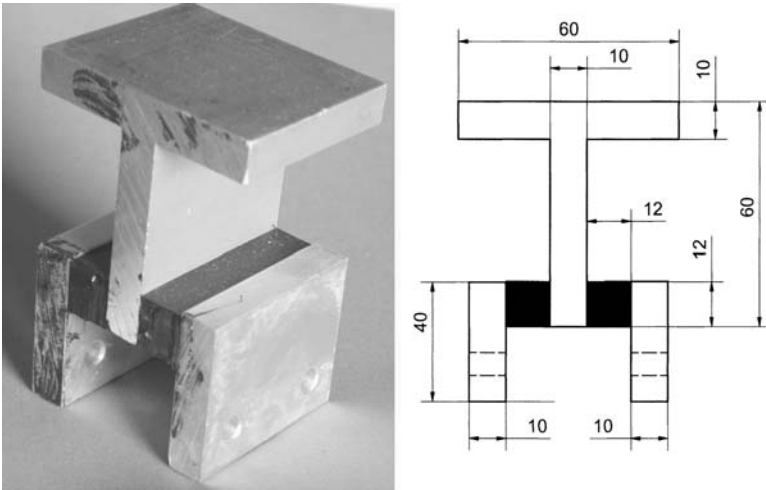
Configuration and dimensions of specimen Type M (dimensions given in millimetres).
